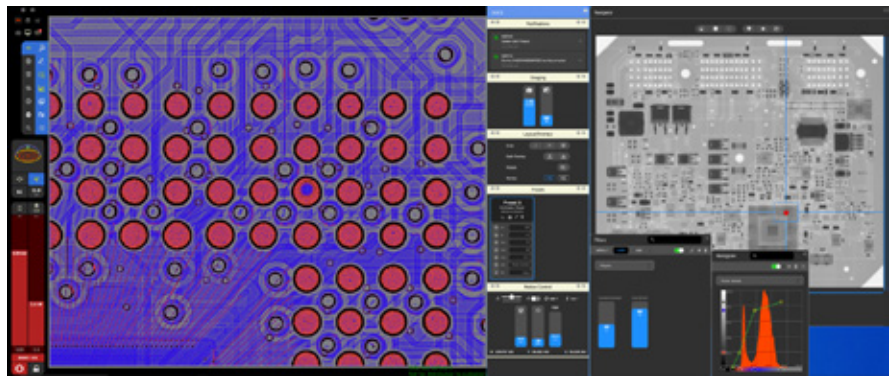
X-ray image of a PCB along with a close-up of one corner of a BGA (location marked with a red dot on the PCB) and a menu to adjust settings.
